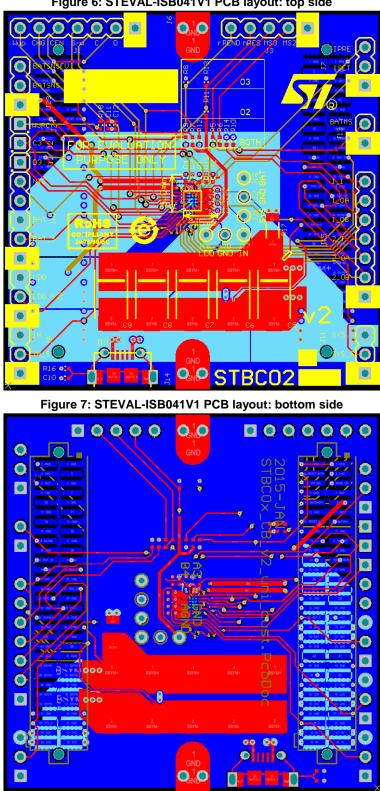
STEVAL-ISB041V1 PCB layout: top side
